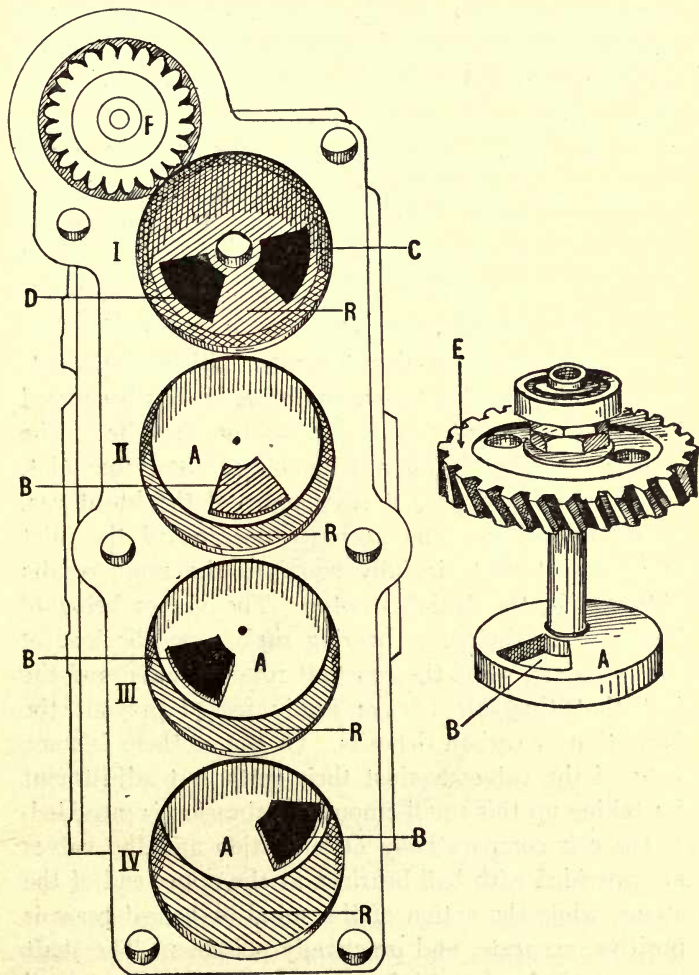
Reynolds Rotary Valve Motor. Top of Cylinder and Valve
